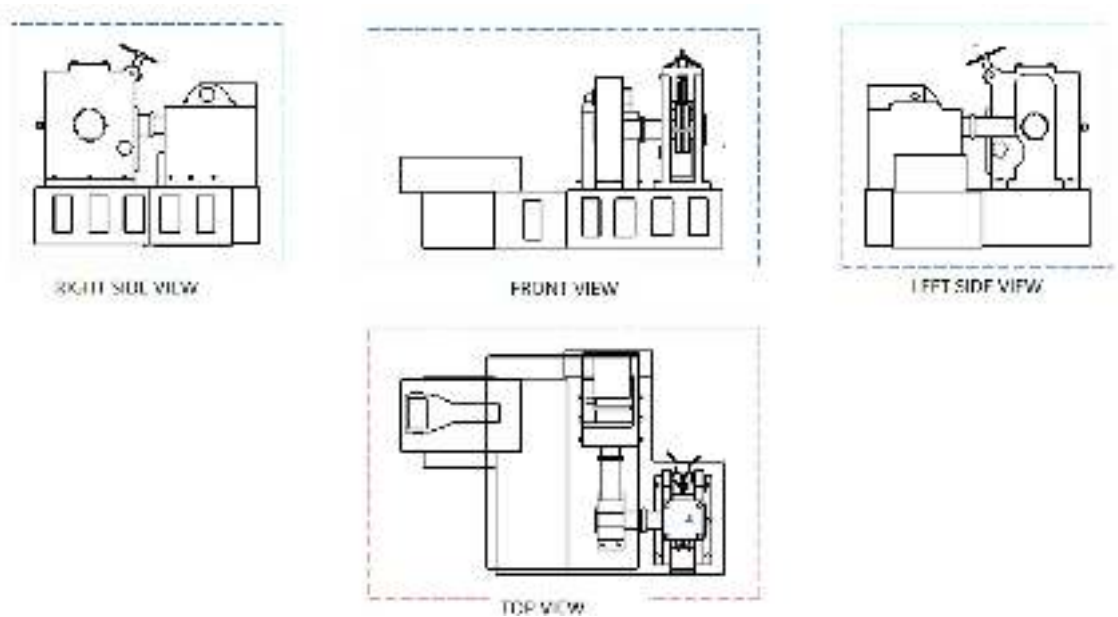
All View of design developed and fabricated setup for 9.5 mm Aluminum feedstock
